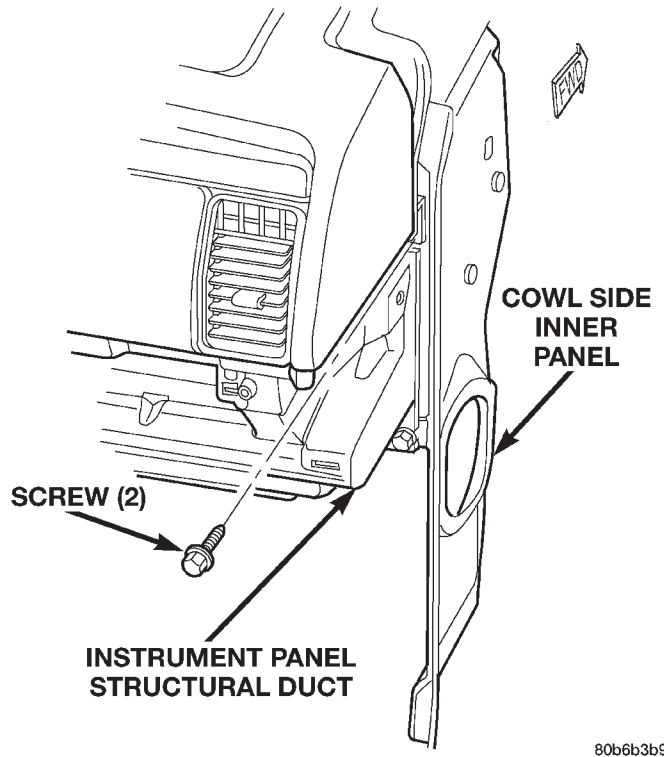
Instrument Panel to Passenger Side Cowl Side Inner Panel Mounting
